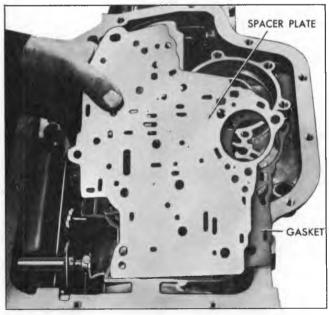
T-Installing Control Valve Assembly Spacer Plate and
